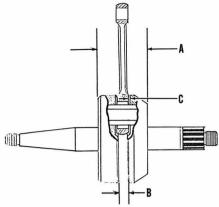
When assembling the crankshaft, observe the dimensional data in-cluded in text. Dimension (A) is distance between outside of crankshaft counter-weights. Distance (B) is between inside of counterweights. Distance (C) is con-necting rod side clearance.
